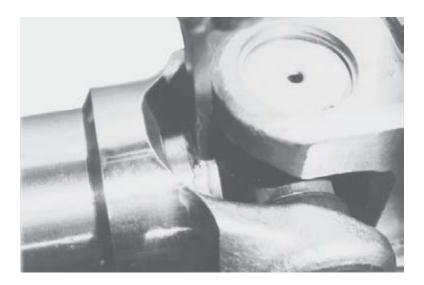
Removing Flex Lock Nut From Input Shaft Using Special Tool T-21093 (Closeup)
